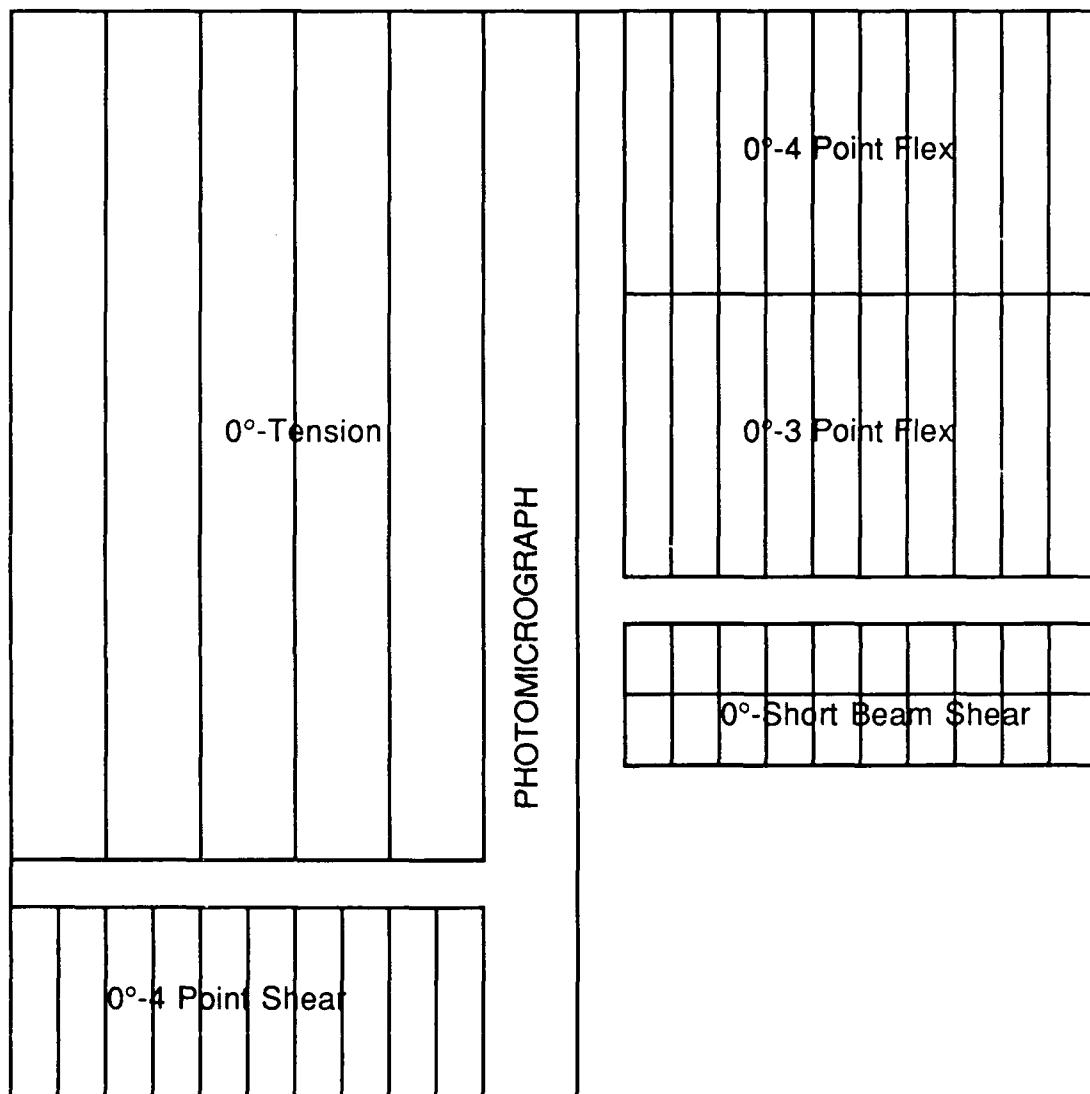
Panel #2: Cut-out Schematic of Tension, Flex and Shear Specimens.
